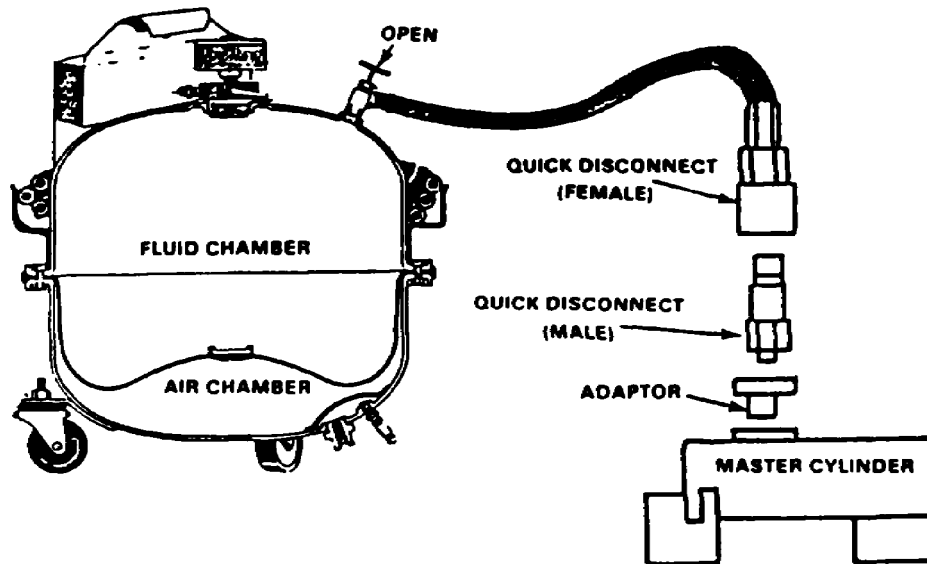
FILLER/BLEEDER CONNECTION TO MASTER CYLINDER
